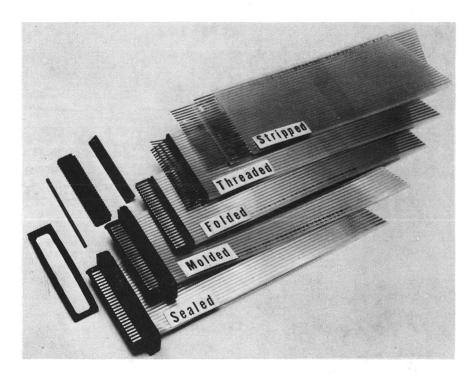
Fabrication of a plug in which cable conductors are used as contacts.
